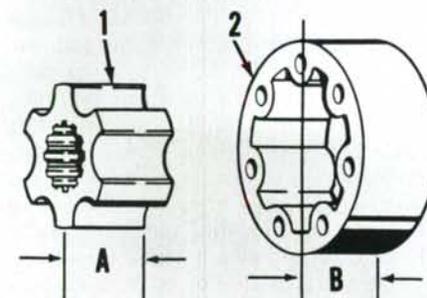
Measure thickness of rotor (1) and stator (2). Renew steering valve assembly if thickness (A) is 0.05 mm (0.002 inch) less than stator thickness (B).
